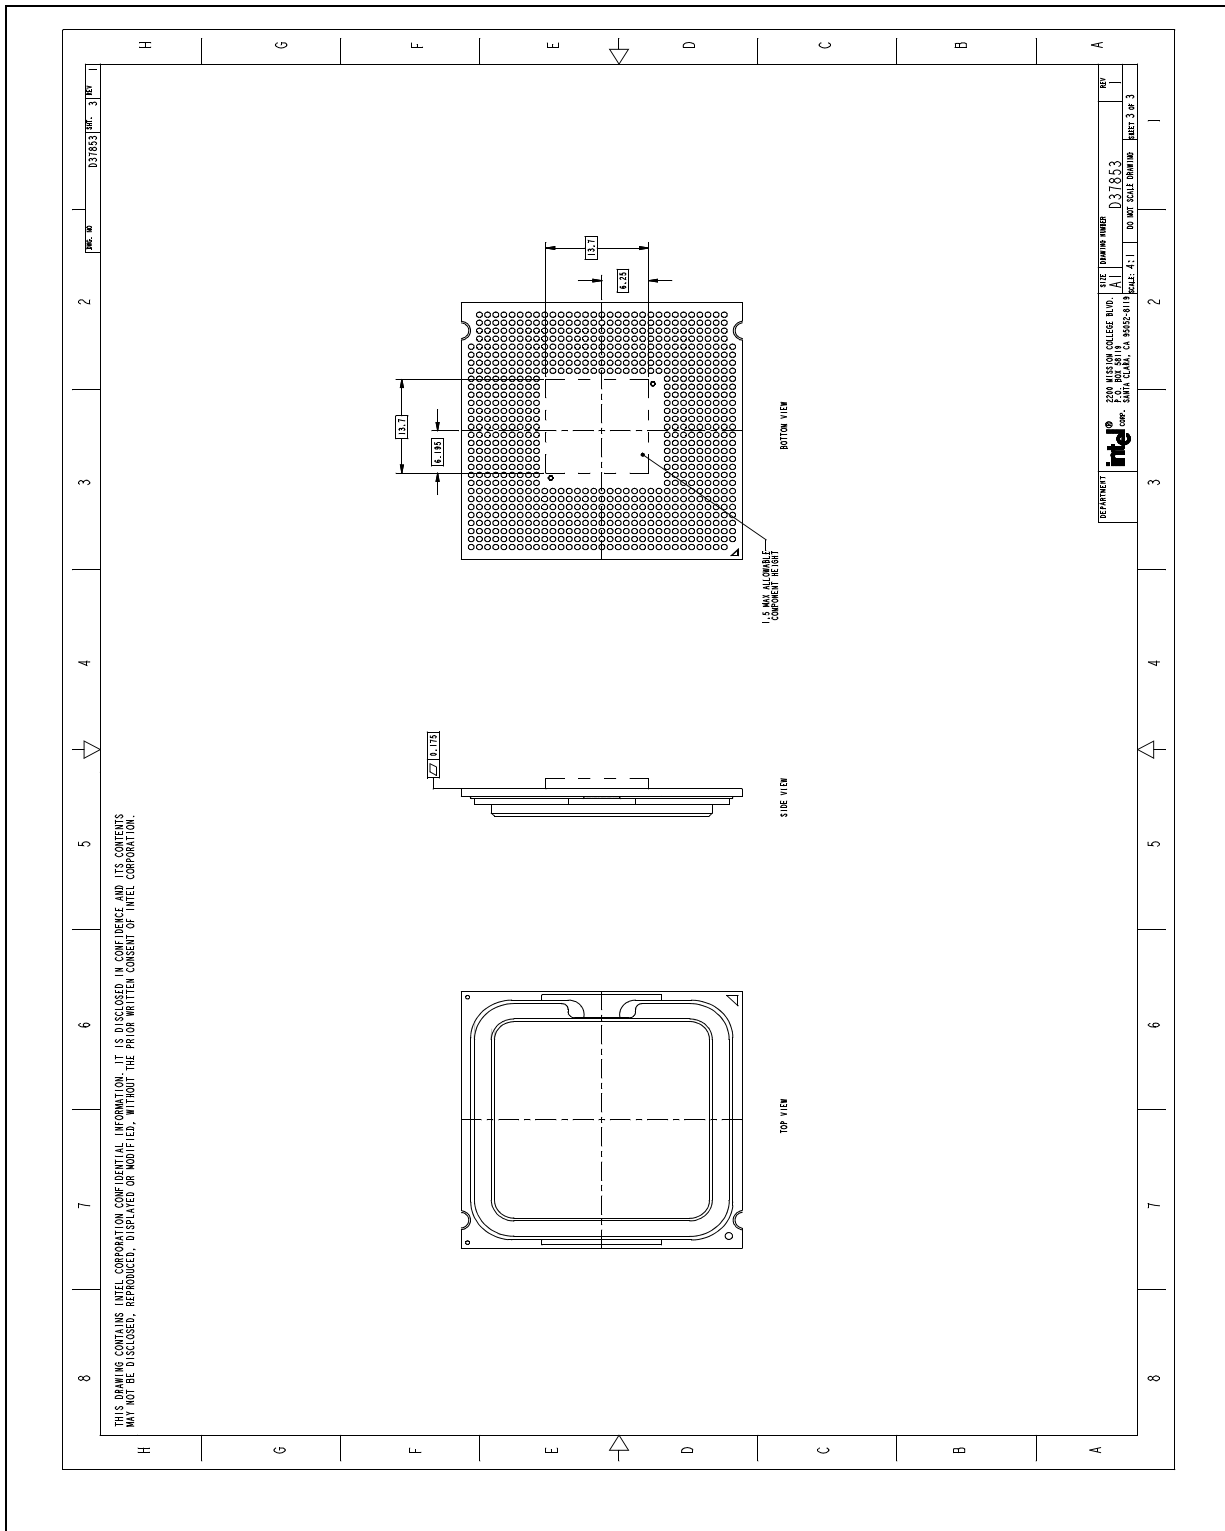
Processor Package Drawing (Sheet 3 of 3)
